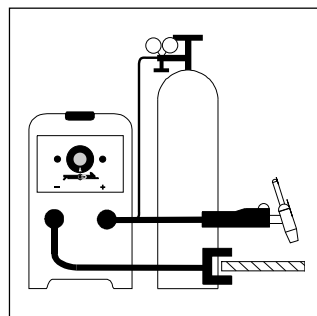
TransPocket 1400 MV as a TIG welding unit
